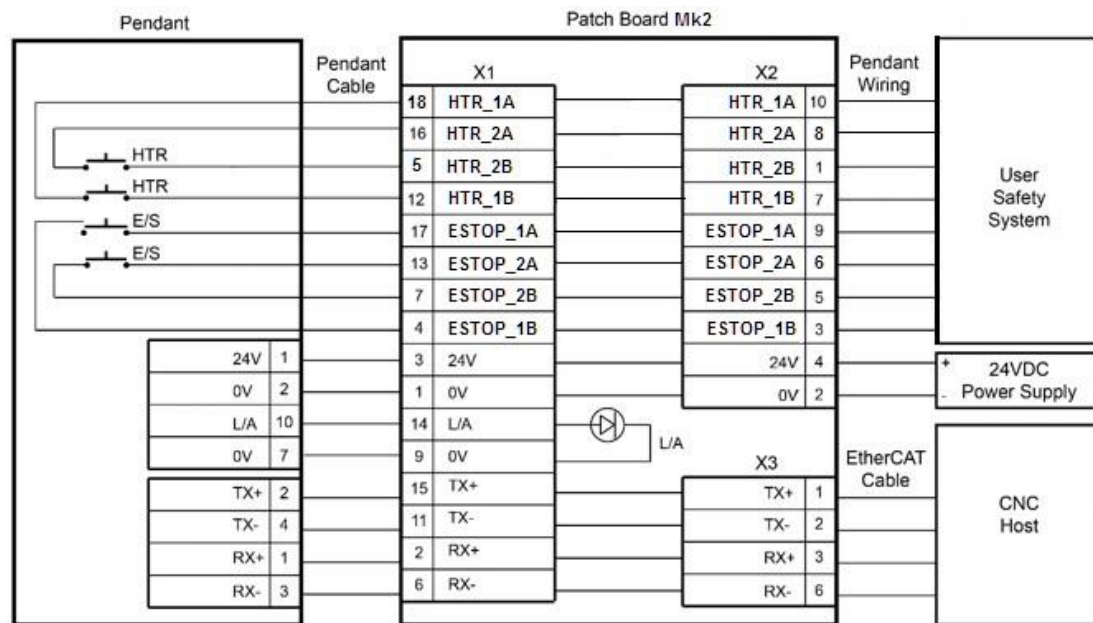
Wiring of the Remote Pendant Patch Board Mk2
